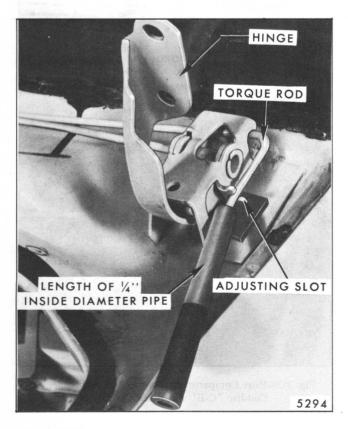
Rear Compartment Torque Rod Adjustment - "F" Styles
